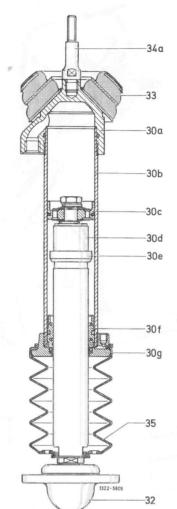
Gas pressure shock for rear axle Upper end cover 30b Cylinder 300 Damper piston 30d Piston rod Collar of piston rod Piston rod guide 30e 30f Lower end cover 32 Ball joint 33 Rubber mount 34a Screw bolt Sleeve
